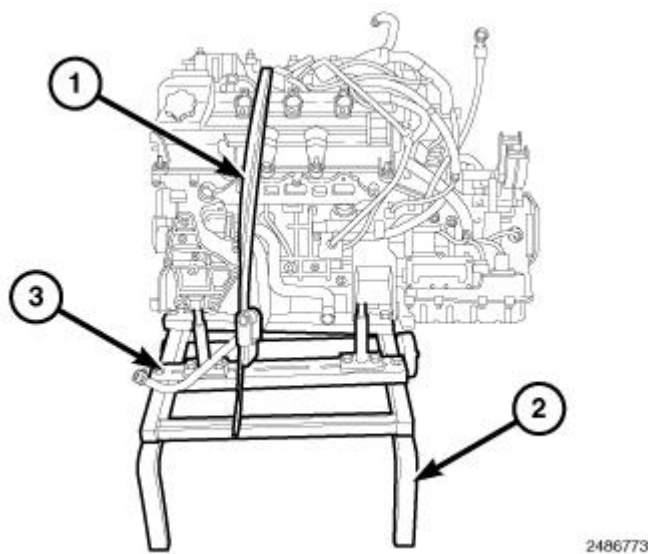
Powertrain Dolly & Engine Support Cradle With Posts
